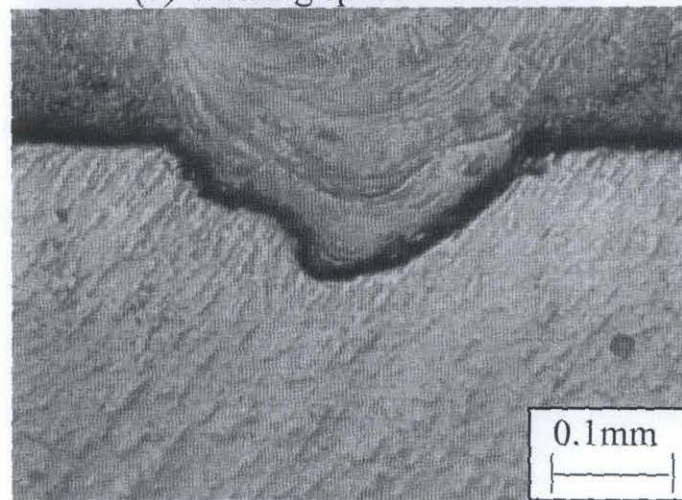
Effect of welding speed on the width of weld metal at the interface of SPCC/A1050 dissimilar laser lap joint.
